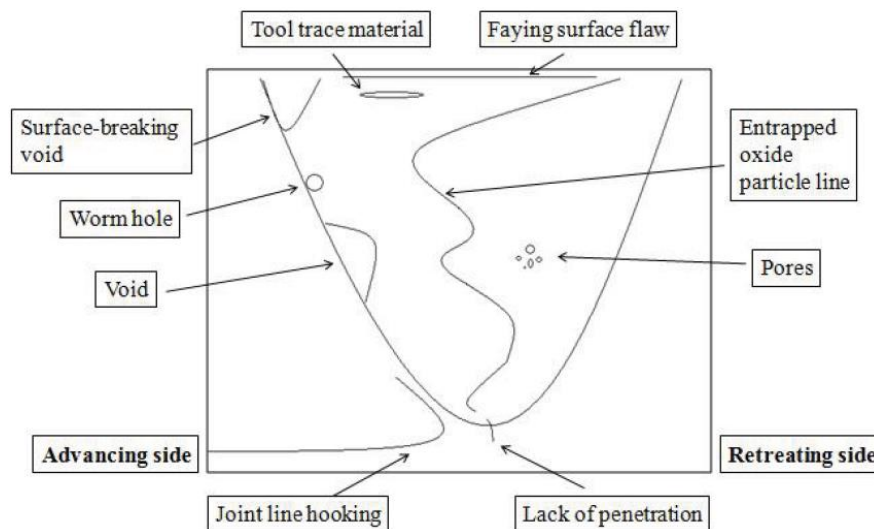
Schematic representation of the location of the FSW copper joints defects [S05]
